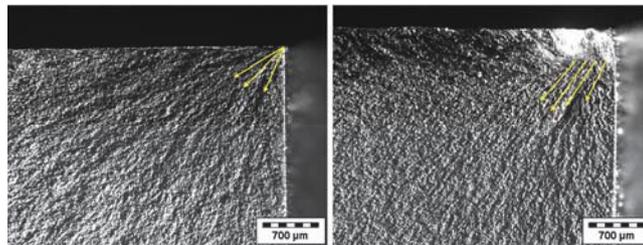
Fracture surface of machined (l) and as-forged (r) plane specimens
